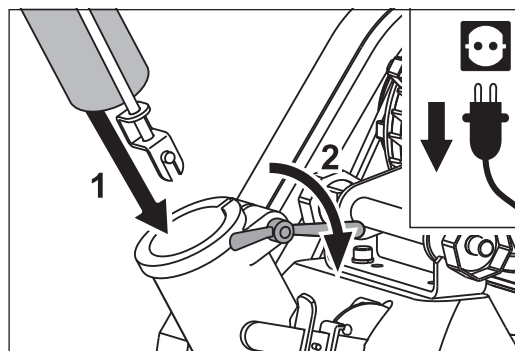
Insert the guide tube into the opening in the machine housing (1). Tighten the wing nut (2).
